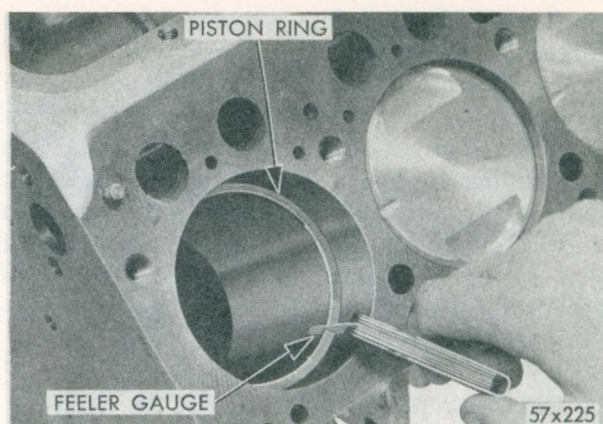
Checking Ring Gap in Cylinder Bore (FirePower)
